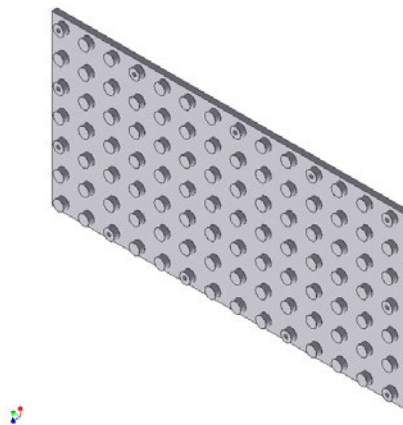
Typical synthetic decking Waffle-shaped (lightweight) panel (bottom face shown – top face same as figure 3).
